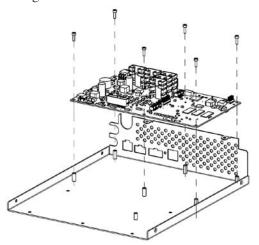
Removing Screws Securing Main PCB to Chassis Plate
